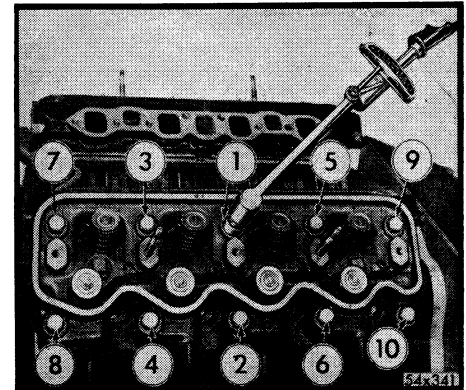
Cylinder head tightening sequence. Single rocker arm V8 engine. 1954-58
